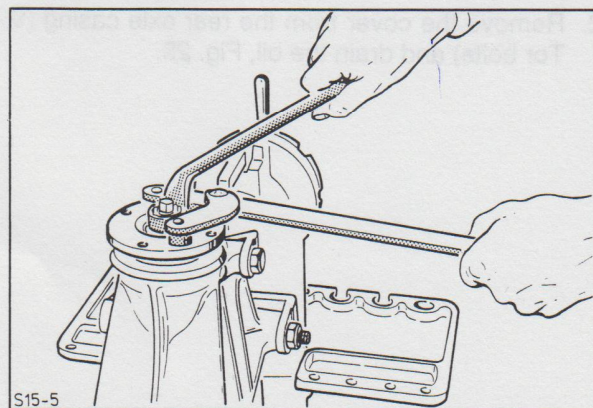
Remove flange nut, holding flange with Special Tool 15-030.
